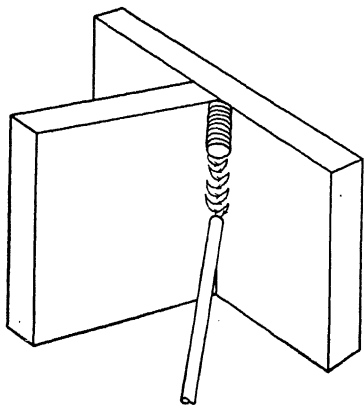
Vertical fillet weld, downhill welding.
